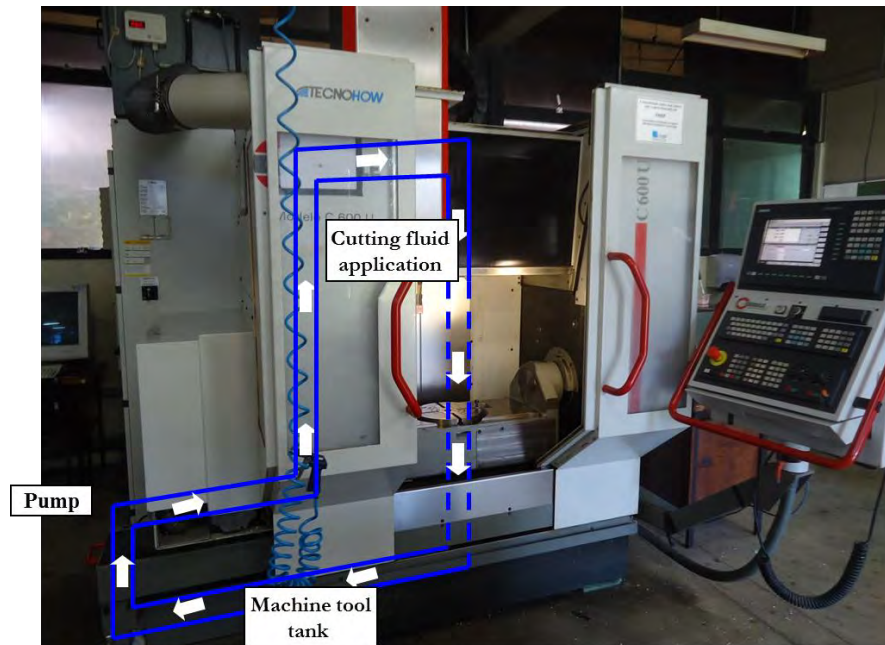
Diagram of cutting fluid flow in the Hermle C 600 U – 5-axis machine tool.
